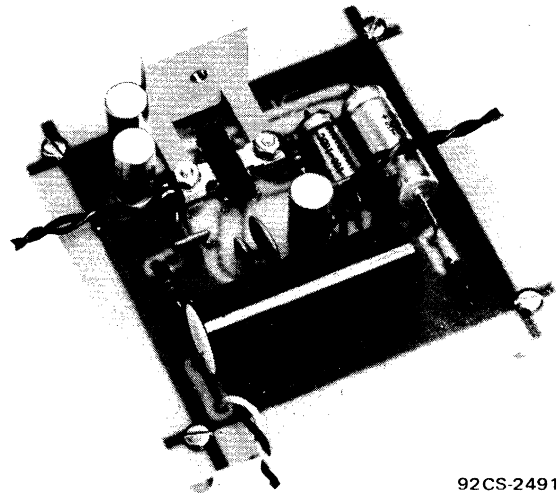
Bottom view of printed-circuit boards shown in Figs. 5 and 6.
